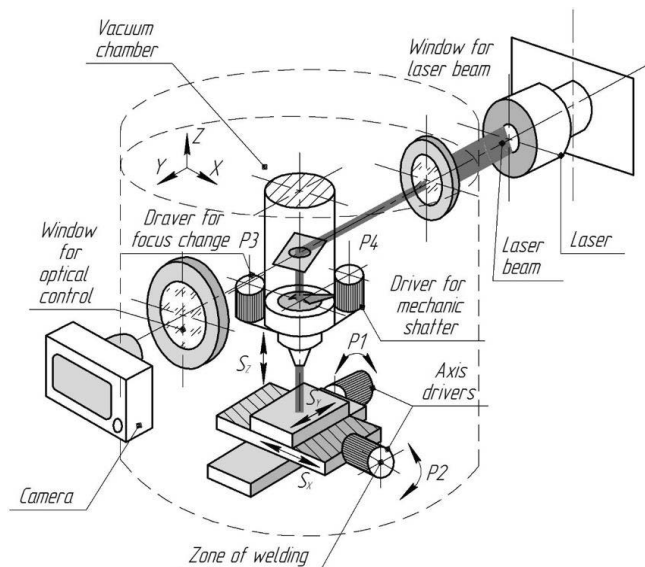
The equipment used and the scheme of the beam exposure to the surface
